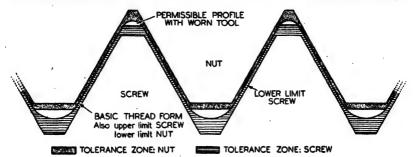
THREAD TOLERANCE ZONES-AMERICAN NATIONAL THREAD
